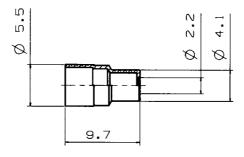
#4 : Crimping ring (for 2.0mm cord)
